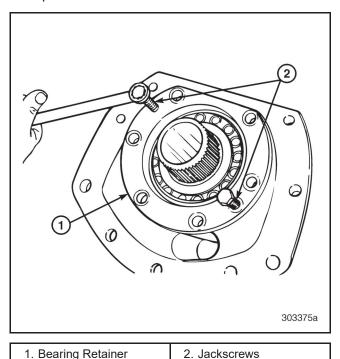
Loosening Bearing Retainer Using Jackscrews
